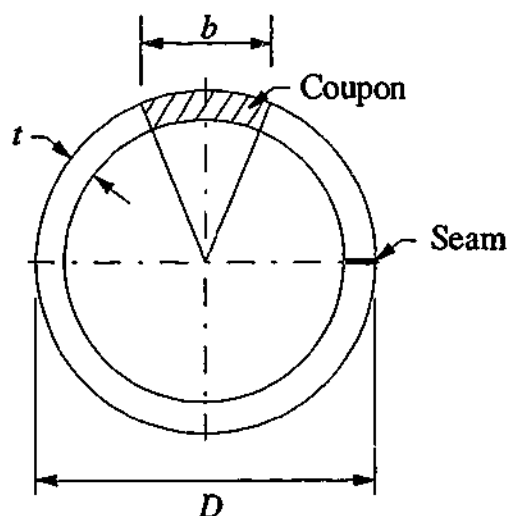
Cross-sectional dimensions of a tensile coupon
